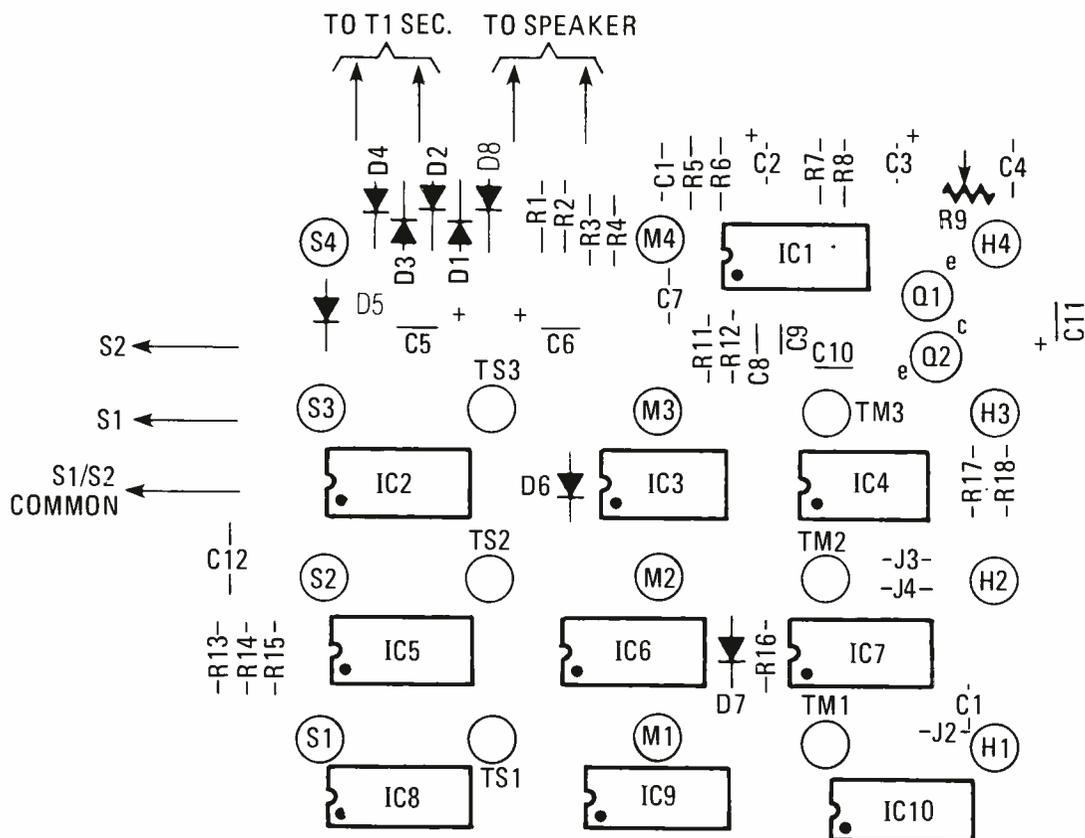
COMPONENT PLACEMENT LOCATION GUIDE diagram for the component side of the printed circuit board. Use this diagram to correctly place parts, and use Fig. 7 in conjunction with this drawing to trace the circuit.
